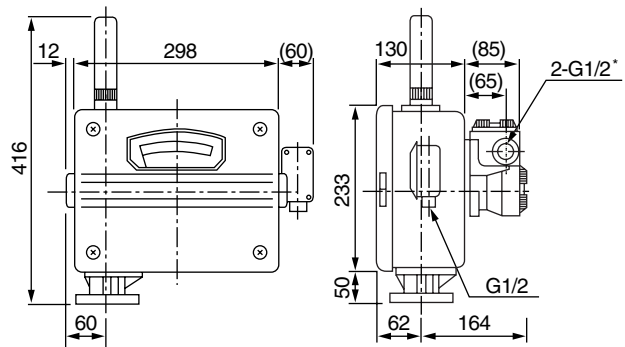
Indicator and transmitter assembly (FS-517W)
